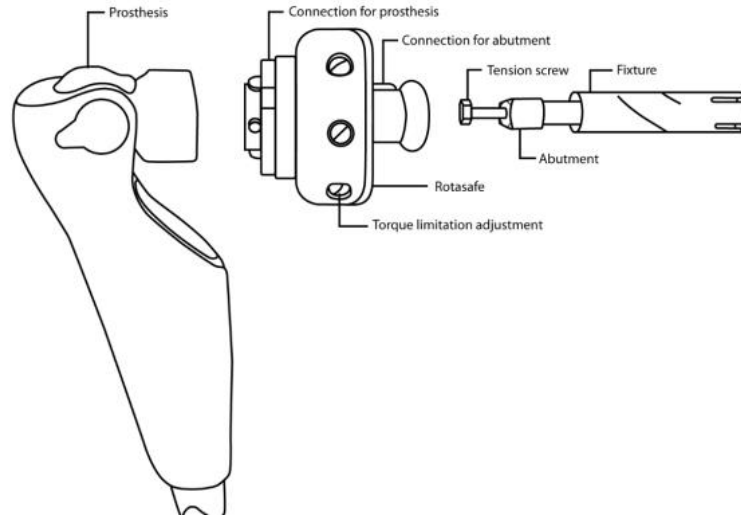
OPRA Rotasafe attachment mechanism. Ref[60].
